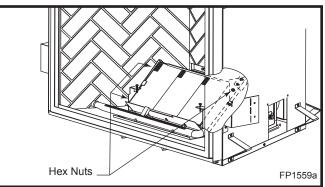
Use 3/8" socket to remove hex nuts holding left burner leg.
